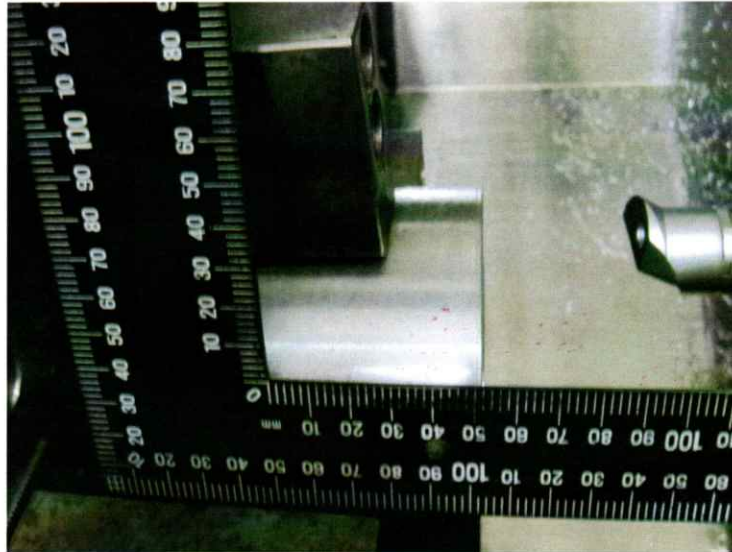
Machining depth of inner diameter of the workpiece in the axial direction (i.e. length of the workpiece)
